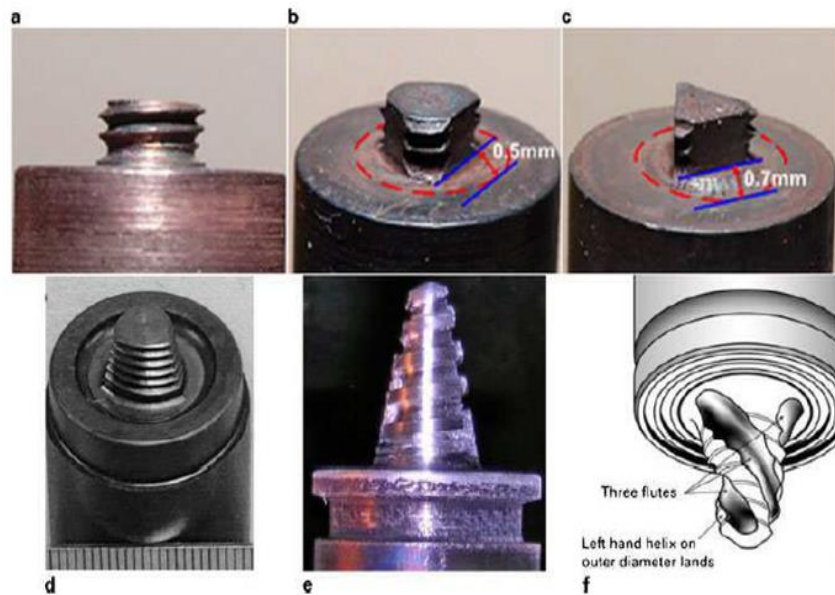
Commonly used tool pin geometries-(a)cylindrical threaded;(b)three flat threaded;(c)triangular;(d)trivex; (e)threaded conical; (f) schematic of a triflute.
